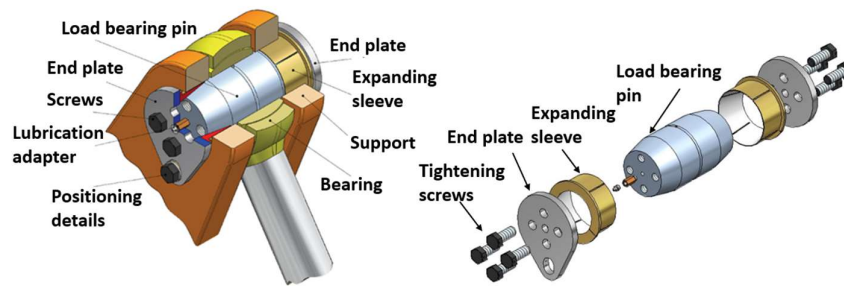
An illustration of an expanding pin, (a) in support, and (b) as exploded view
